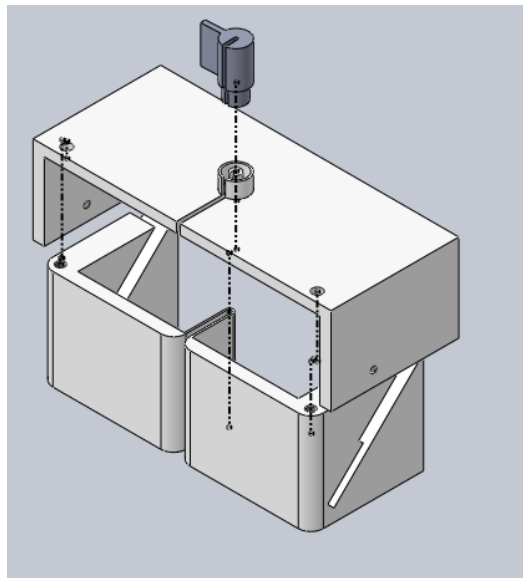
An exploded assembly of the final design is depicted in SolidWorks.
